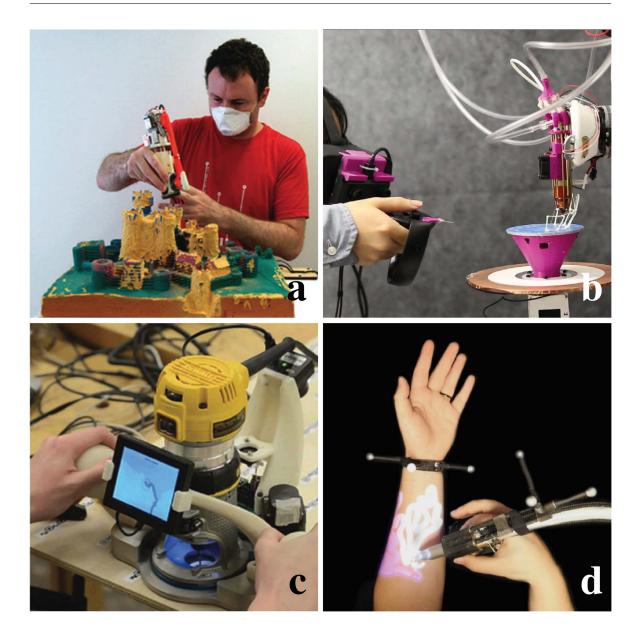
Examples of smart handheld tools for interactive fabrication include: a) FreeD, a freehand digital sculpting tool [265], b) RoMA, a robotic 3D printing assistant [154], c) ShaperTool, a position-correcting tool for precise large-scale cutting [179], and d) ExoSkin, a hybrid tool for printing digital artifacts directly on the body [56].
